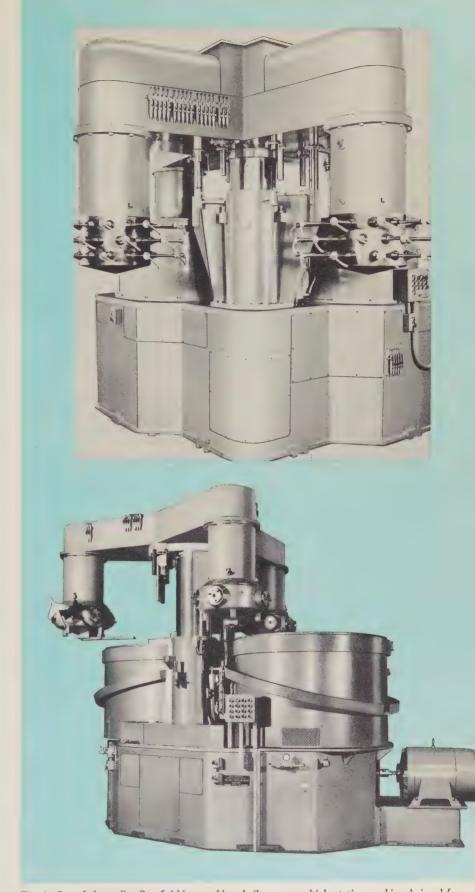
One of the earlier Gyrofinishing machines built was a multiple station machine designed for finishing automotive interior door hardware (top). A later machine was the Three Station Gyrofinisher (bottom) which shows the processing heads in the raised position and illustrates the feathering spindles and abrasive collection troughs.
